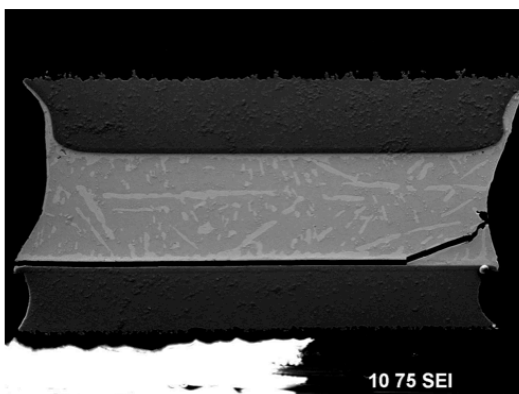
SEM image of solder joint Pin2 in Component AT3 on Board T06 (full cracks were founded in 7 solder joints in this component)
